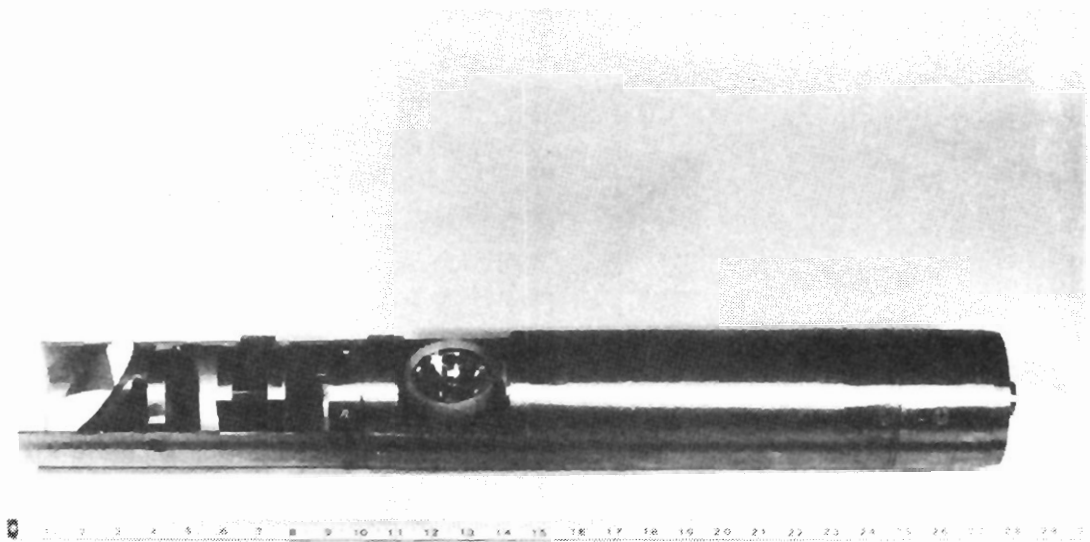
ROTOR ASSEMBLY AND PACKING GLAND
